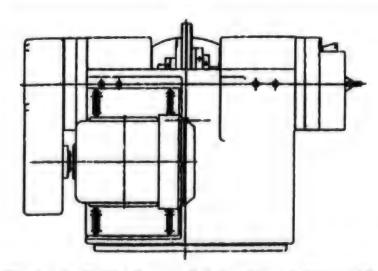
Drawing of a Positive/Reverse Rotating Prismatic Diamond Rotary
